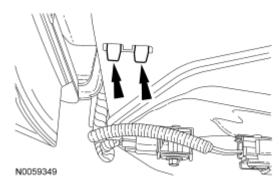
Locating Driveshaft Aside Bolts Courtesy of FORD MOTOR CO.
